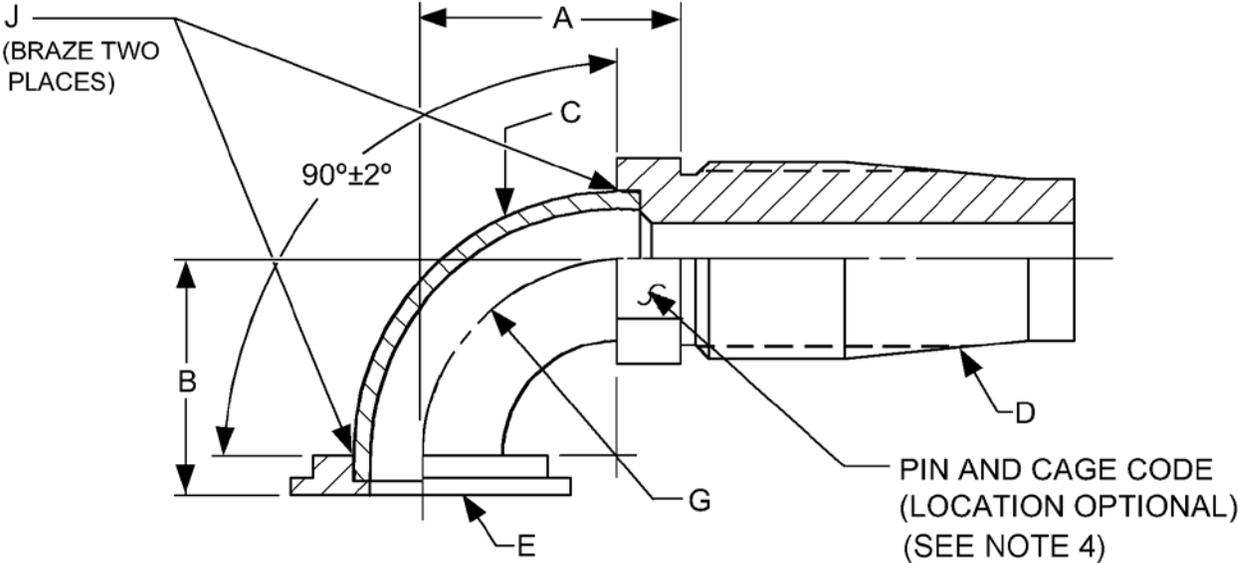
90° Flange nipple assembly dimensions and configuration.
